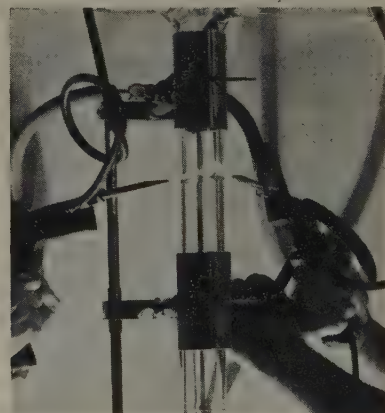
Field welding of PYREX brand glass pipe line
